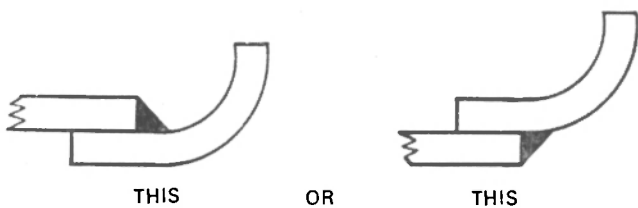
B. The Engineer must design with accessibility in mind for truly low cost welding.
